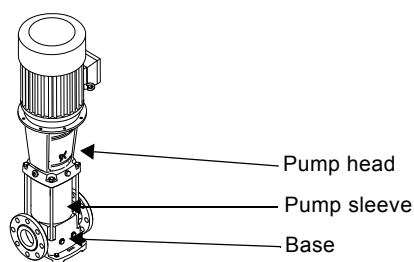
Hot surfaces on a CR, CRI, CRN pump
